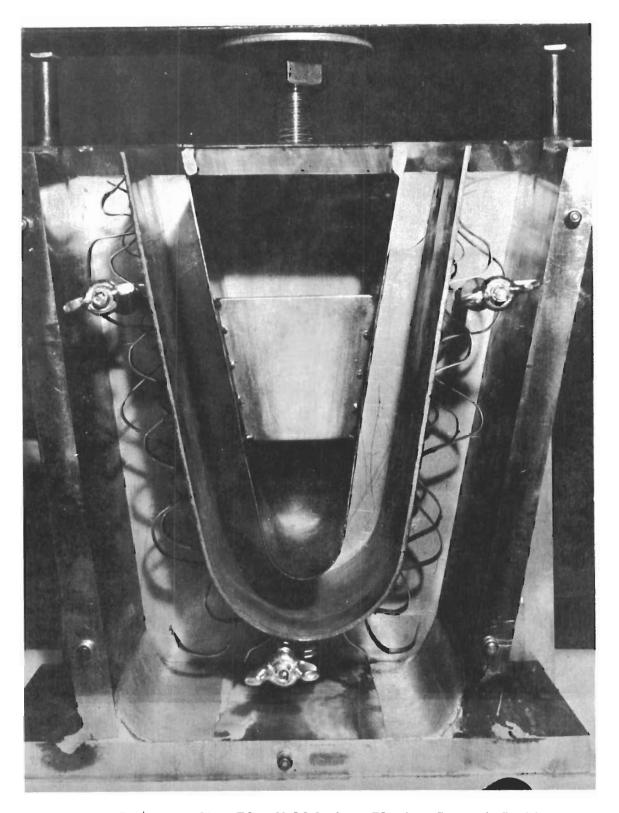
Leading Edge Mold before Plaster Support Casting
